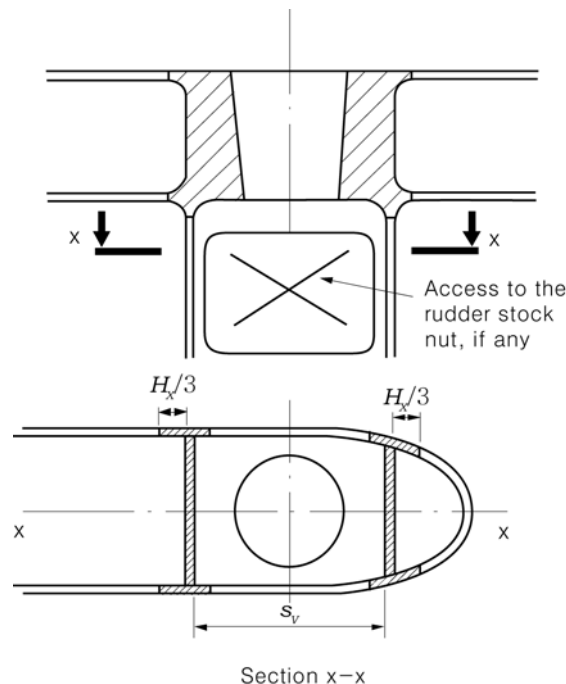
Cross-section of the connection between rudder blade structure and rudder stock housing
